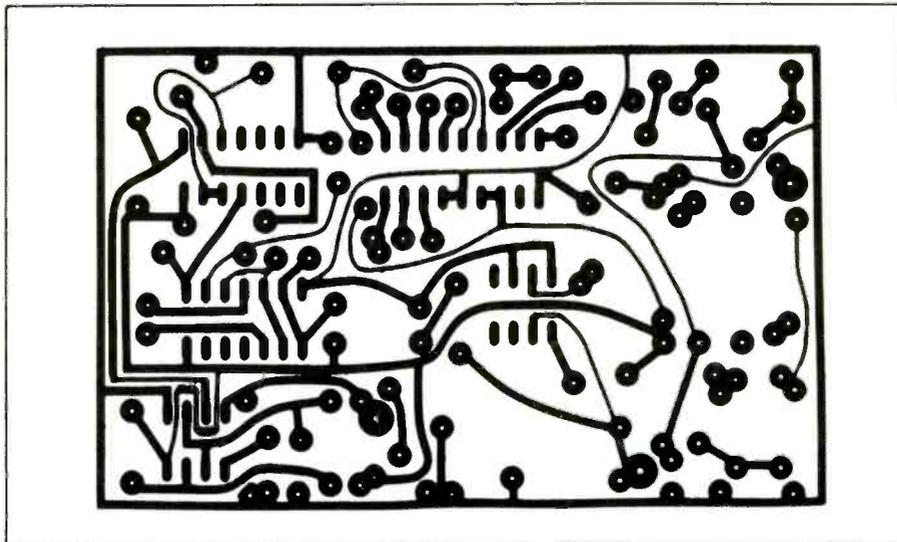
Actual-size etching-and-drilling guide to be used for fabricating pc board.
